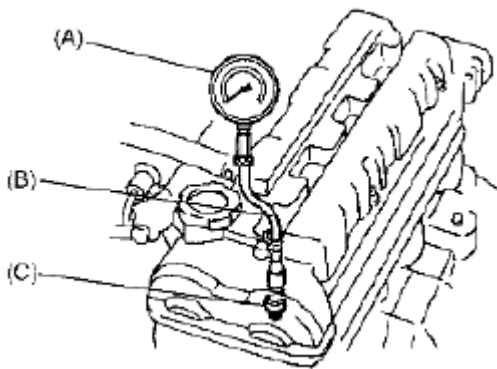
Installing Special Tool (Compression Gauge) Into Spark Plug Hole
